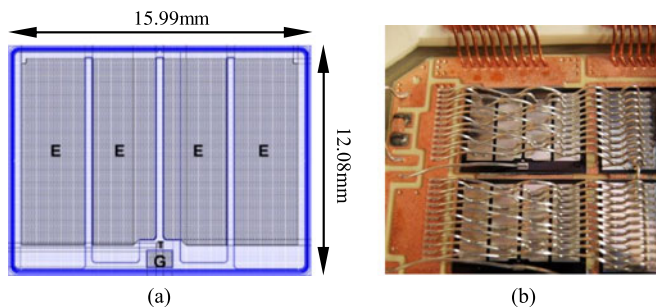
IGBT B. (a) Geometry of Infineon IGC193T120T8RM bare die. (b) Dies inside FF600R12ME4 module after dielectric gel is removed.
